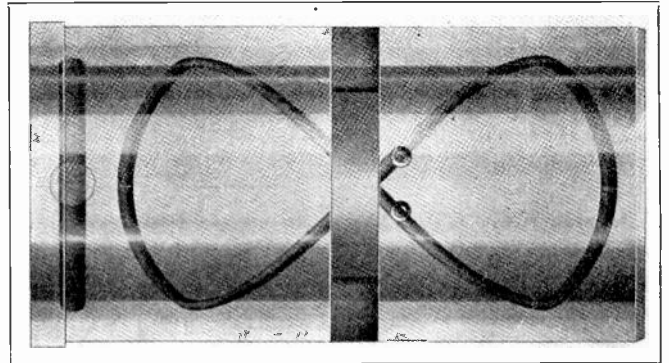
Phantom view of sleeve bearing, showing oil grooves and oil ring slot.
